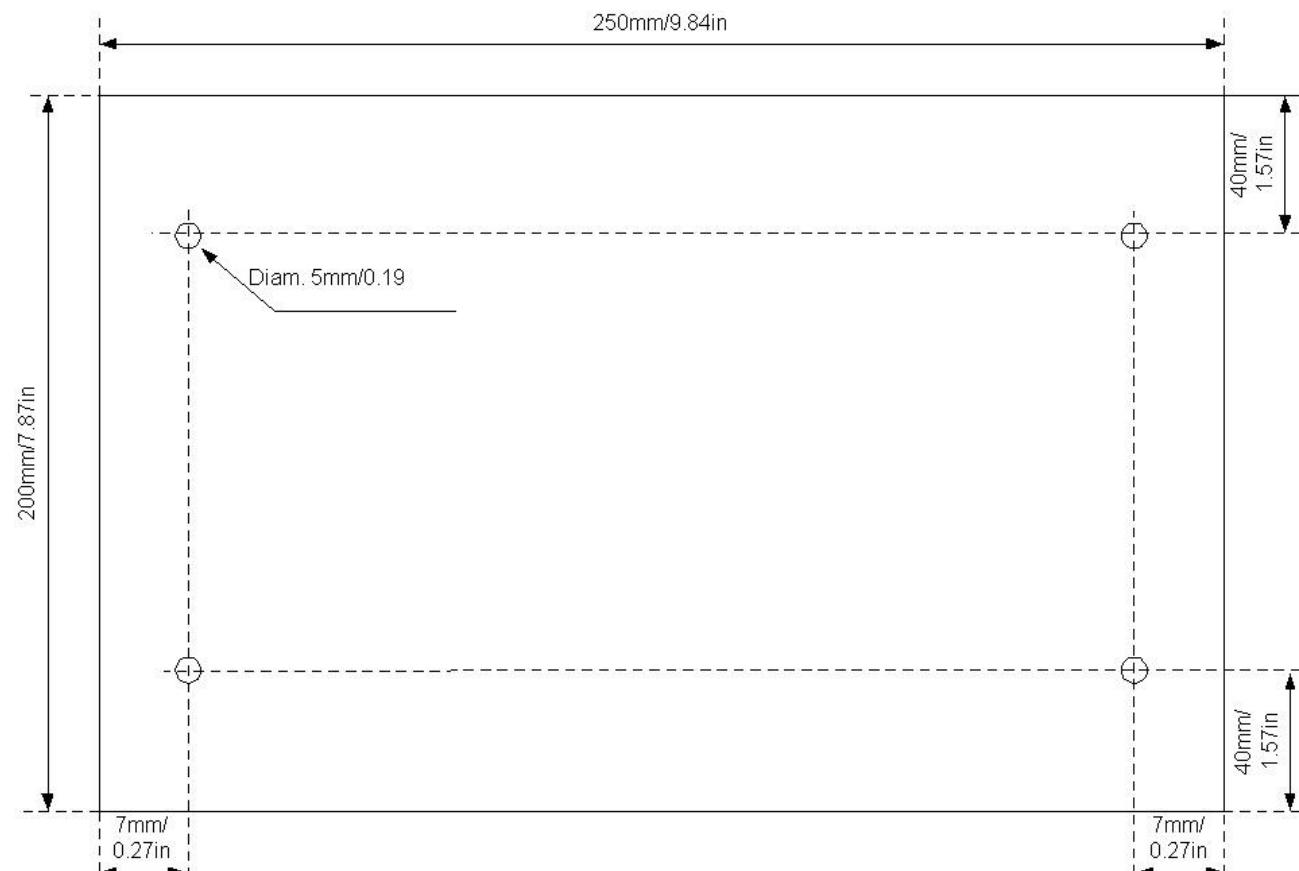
GENSYS 2.0 CORE MOUTING DIMENSIONS
